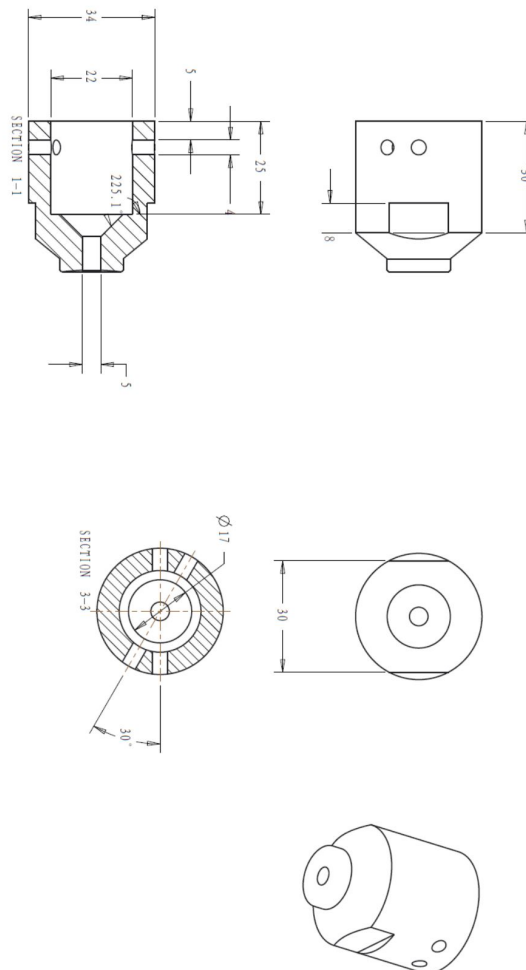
The engineering drawing of FSW tool's shoulder. All dimensions are in mm.
